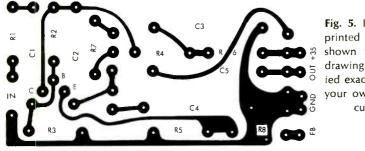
Layout for the printed circuit board shown full size. This drawing may be copied exact size to make your own printed circuit board.
